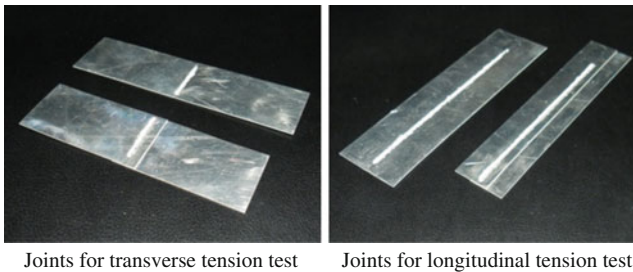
Weld specimens prepared using  $\mu$ FSW
